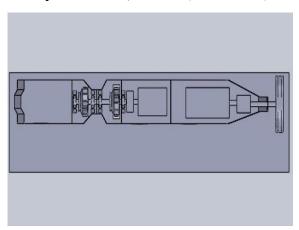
, Placement of machine, gearbox, impeller for lift, impeller for thrust, and holder (top view)
